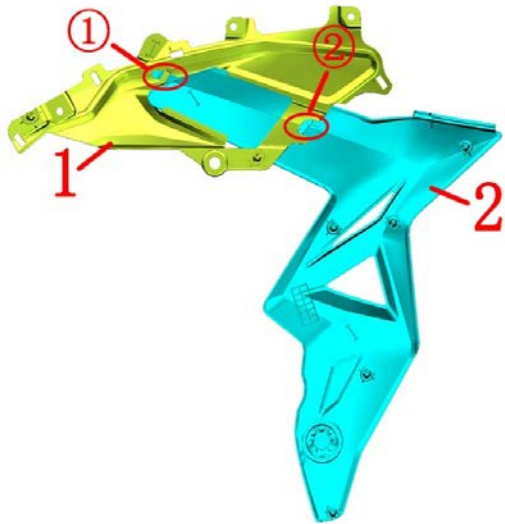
Side Cover Assembly		Side Cover Assembly 2		CHK
